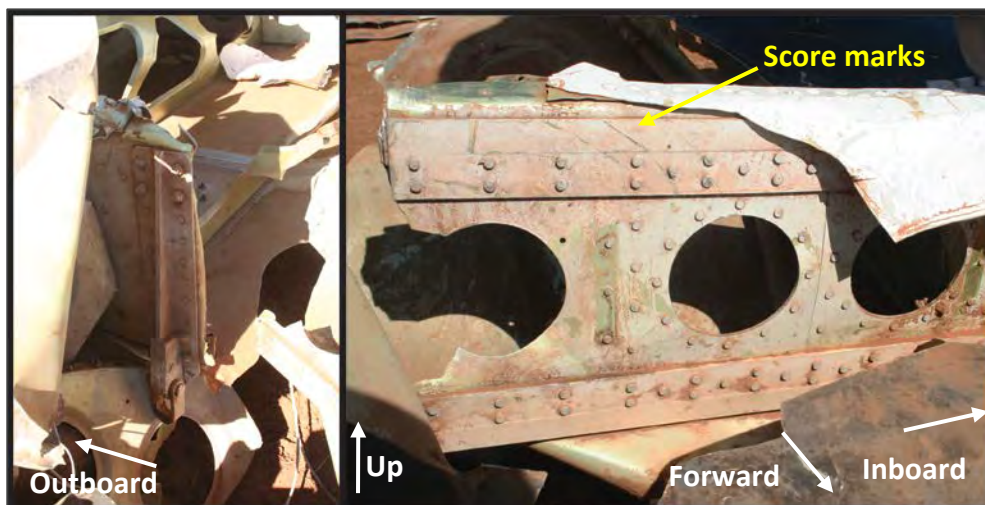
Right wing outboard and inboard main spar fracture (looking rearward)
